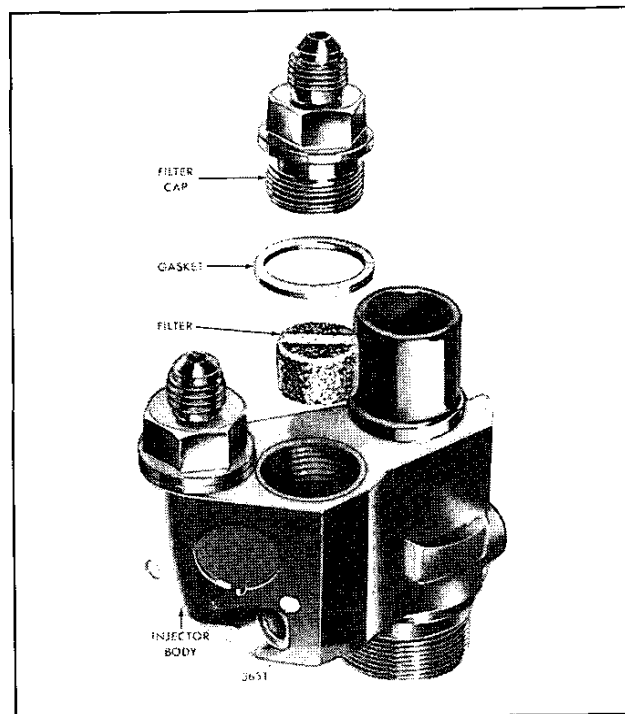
Details of Injector Filters and Caps and Their Relative Location
